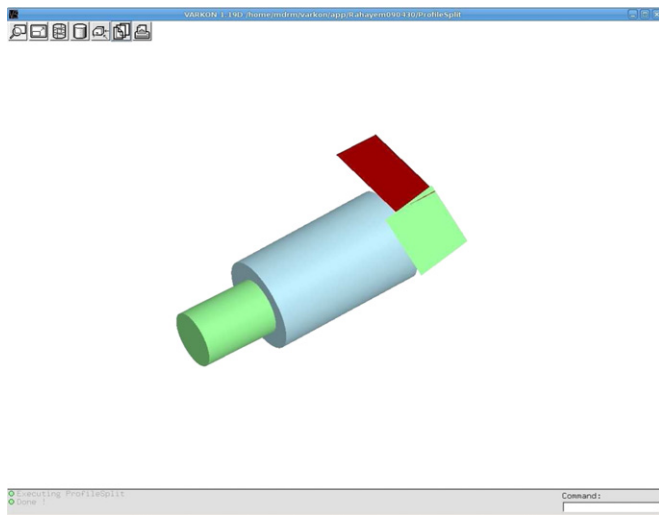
Fitting cylinders to segmented surfaces – Object 1.
